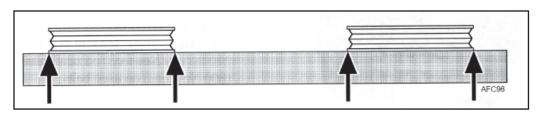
Straightedge Alignment Showing 4 Points of Contact - Correct
